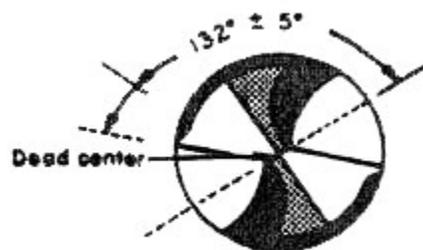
Drill Angles: Locations of Point and Center of Drill
